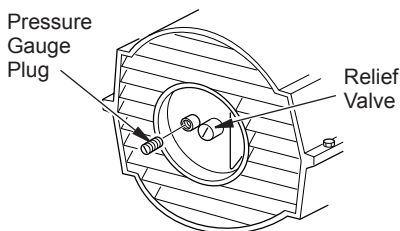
Pressure Gauge Plug Removal (40/55/60/70 Models Shown)
